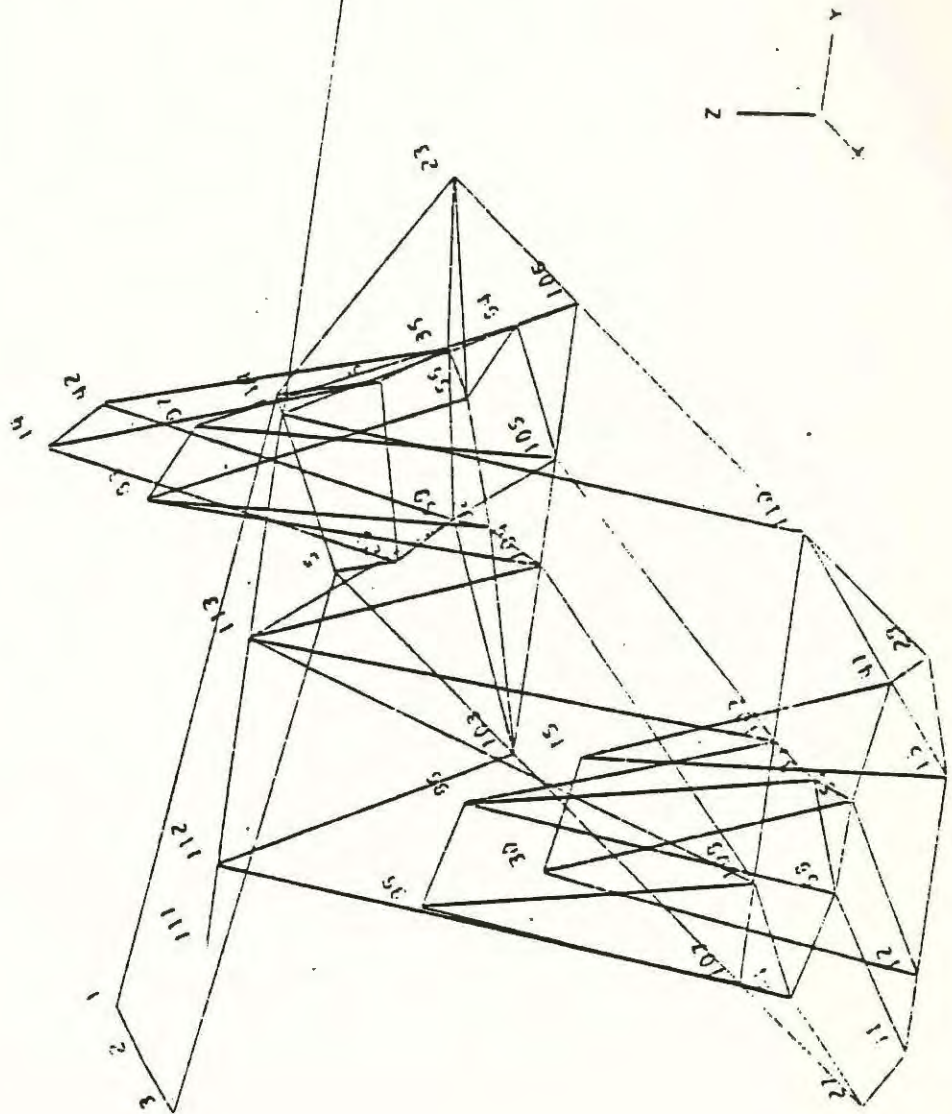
PRIMARY SPRING PADS, NON-STEERING SIDE - Groups 13,14,15,16.
